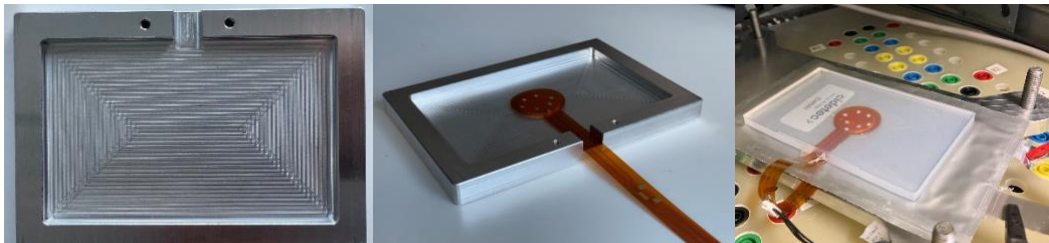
Casting mold (left), with flex PCB (middle), finished sensor mat with cell (right)
